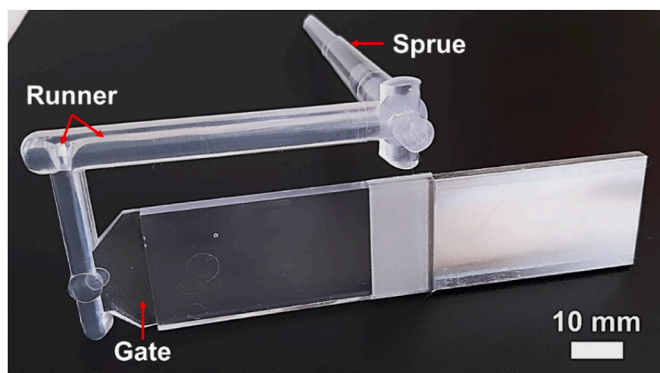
Photograph of an injection overmolded PC/AA6061 joint specimen containing the sprue, runner and gate.
